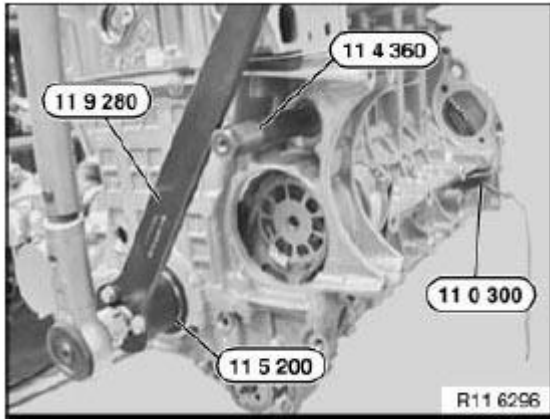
Identifying Special Tool (11 9 280, 11 4 360, 11 5 200 And 11 0 300)
